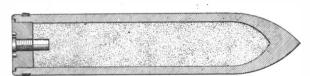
12-INCH TORPEDO SHELL; 144 POUNDS OF HIGH EXPLOSIVE.
